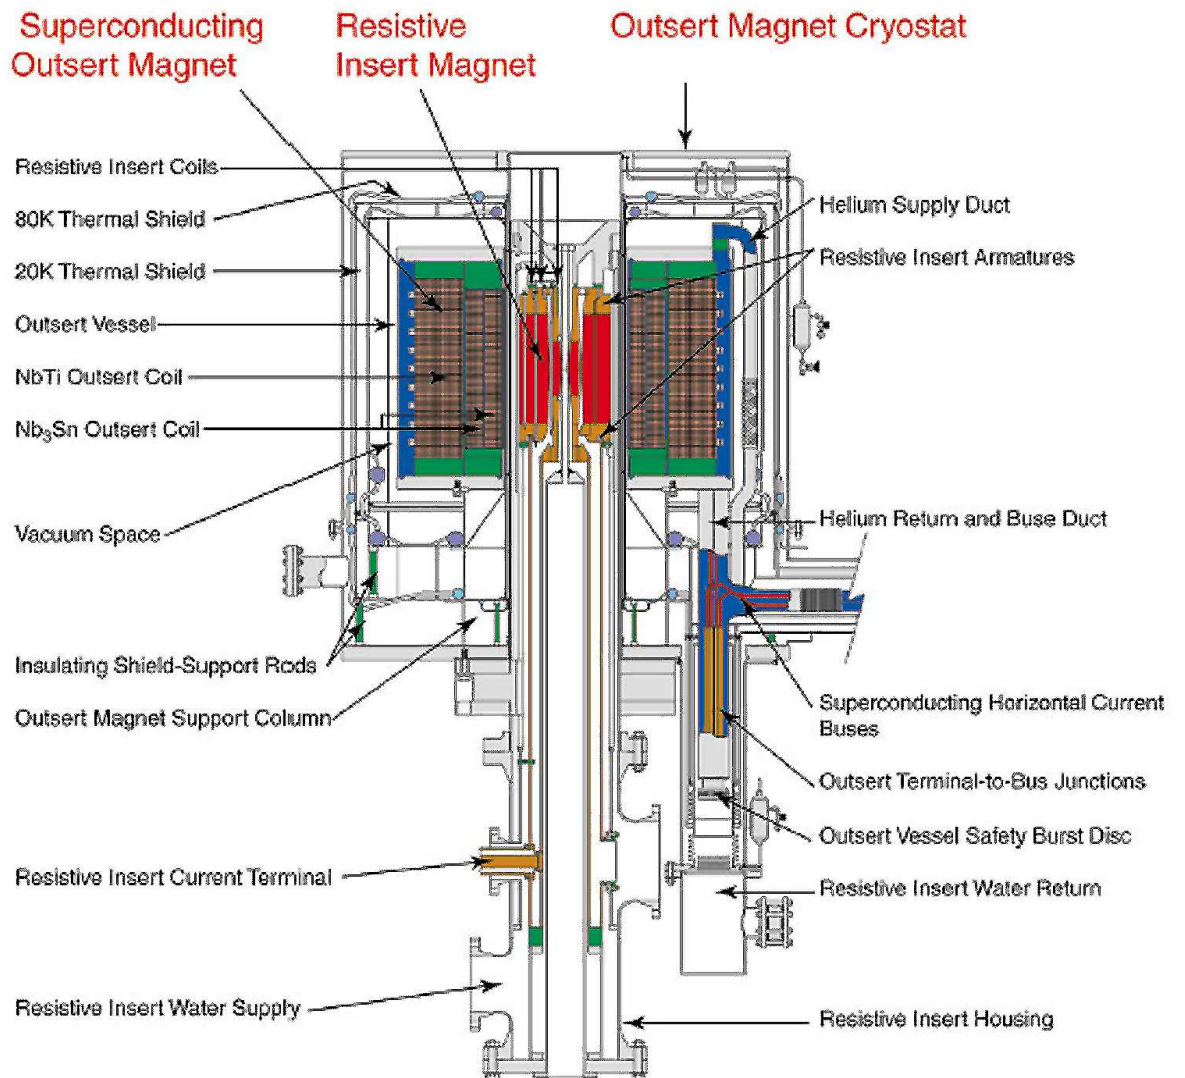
Sectional drawing showing the major components of the hybrid magnet at NHMFL, Tallahassee. Figure from Ref. [53].
